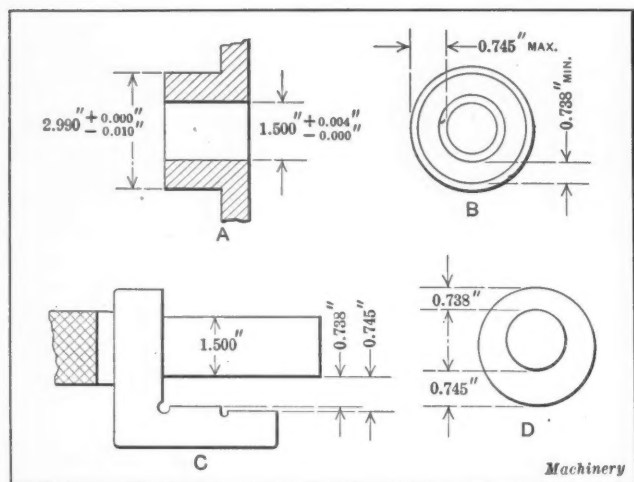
Illustration showing how Compound Tolerances are involved when testing the Concentricity of a Hub with a Hole
